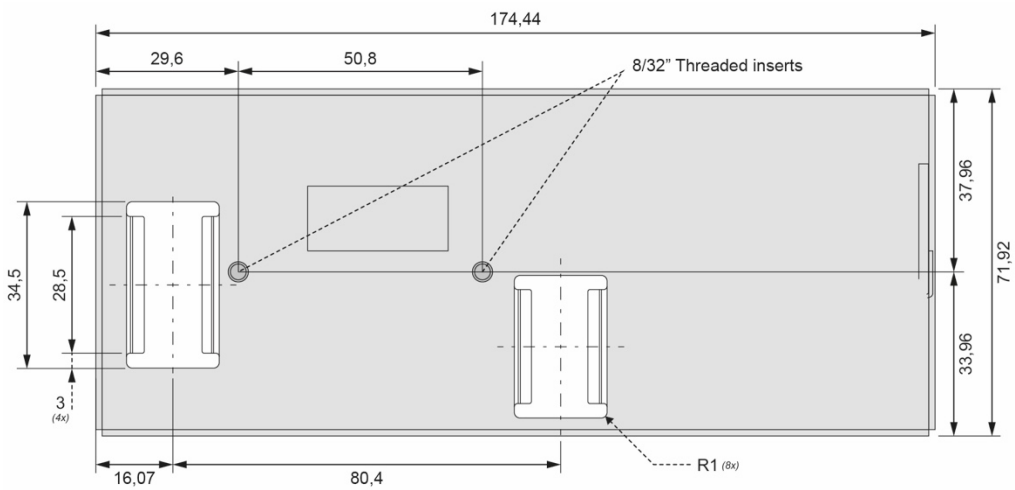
1-channel 75W /B: dimensions, bottom view
